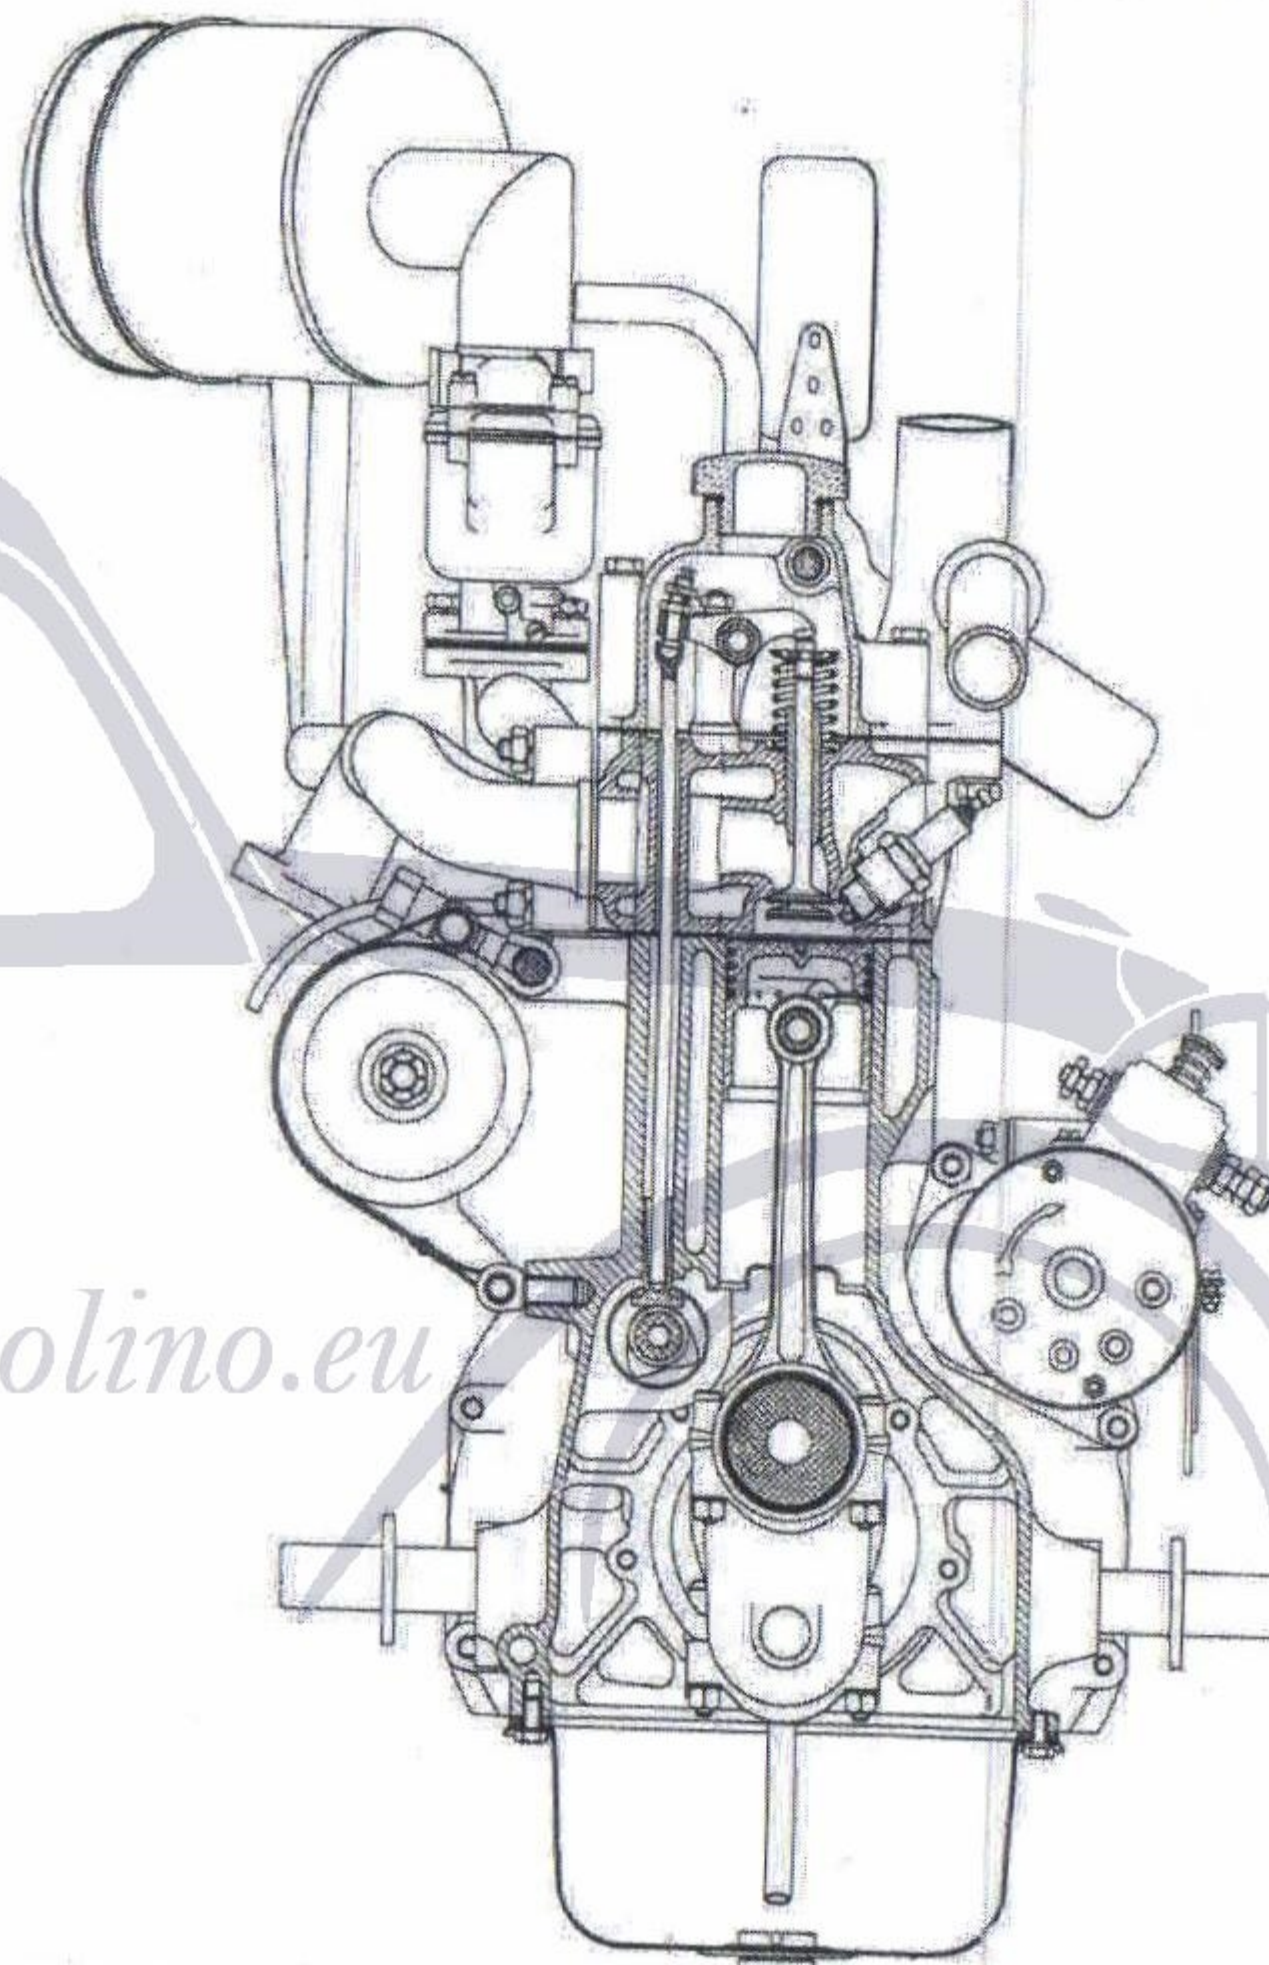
Front cross section of engine Mod. « 500 B » on connectings rod and valve gear.
